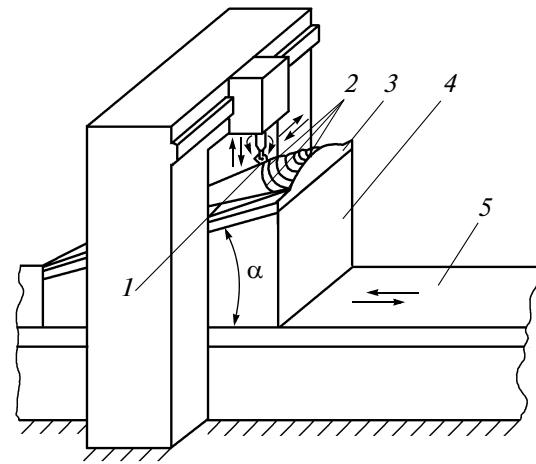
Position of the blank in machining a second-order surface on a numerically controlled 6M616 three-coordinate longitudinal-milling machine.
